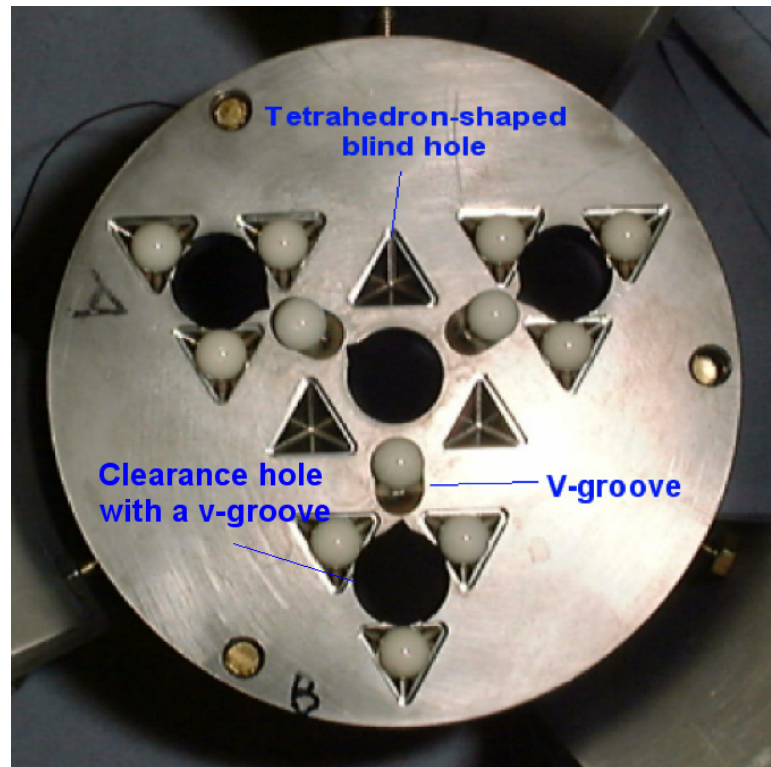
A photograph of the bottom disk with alumina balls. Three v-grooves at the central part of the disk is to mount the spacer.
